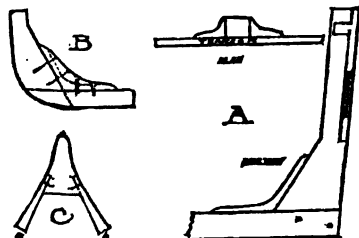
A side view of stern post of Whitehall boat, showing how post is fastened to keel and how it is cut away for stern board. B, junction of stem and keel, C, sectional view of stem, showing how the outside planking is rabbeted to stem.
